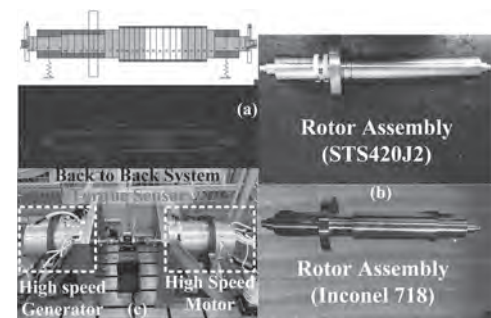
(a) Rotor shape of designed (b) rotor assembly (c) Test bed of high-speed permanent magnet synchronous generator.
